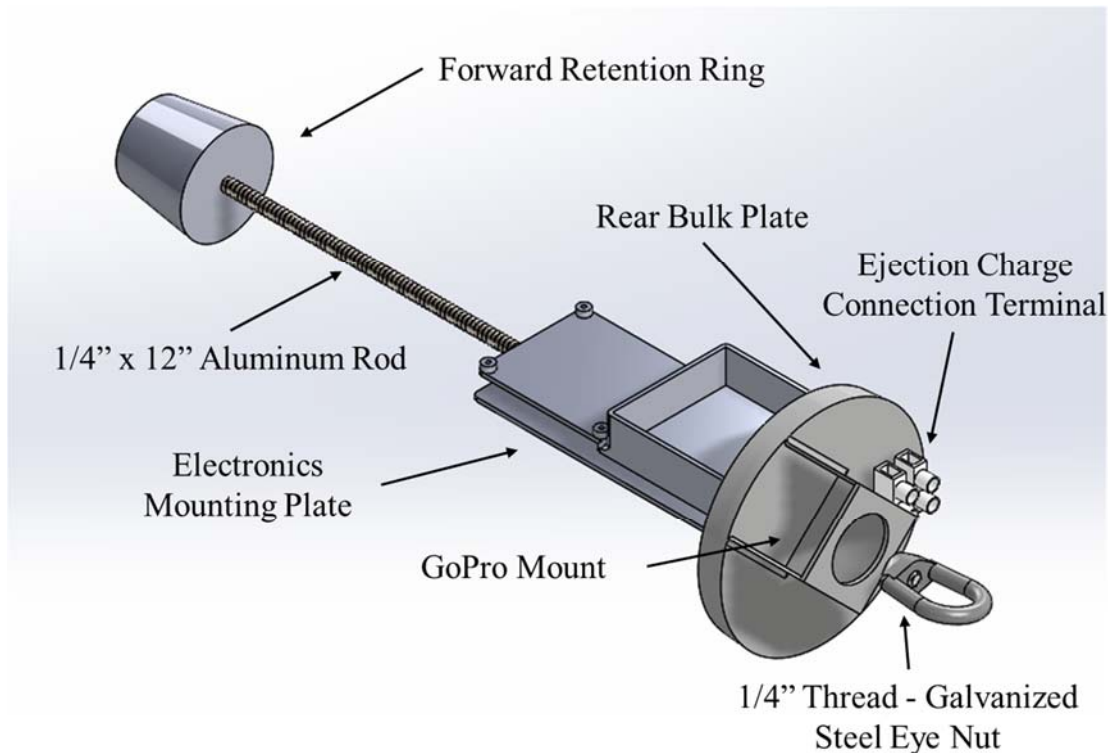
Upper Nose Cone Electronics Mounting Assembly
